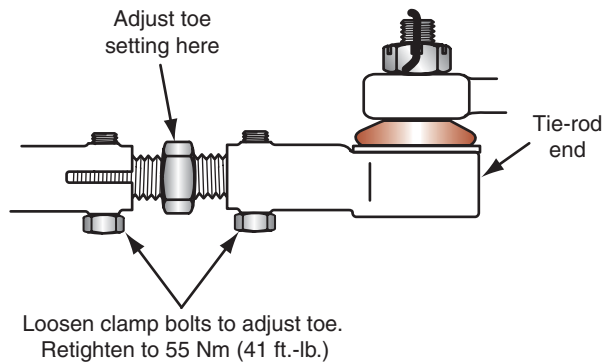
Proper tie-rod adjusting sleeve and clamp position.
